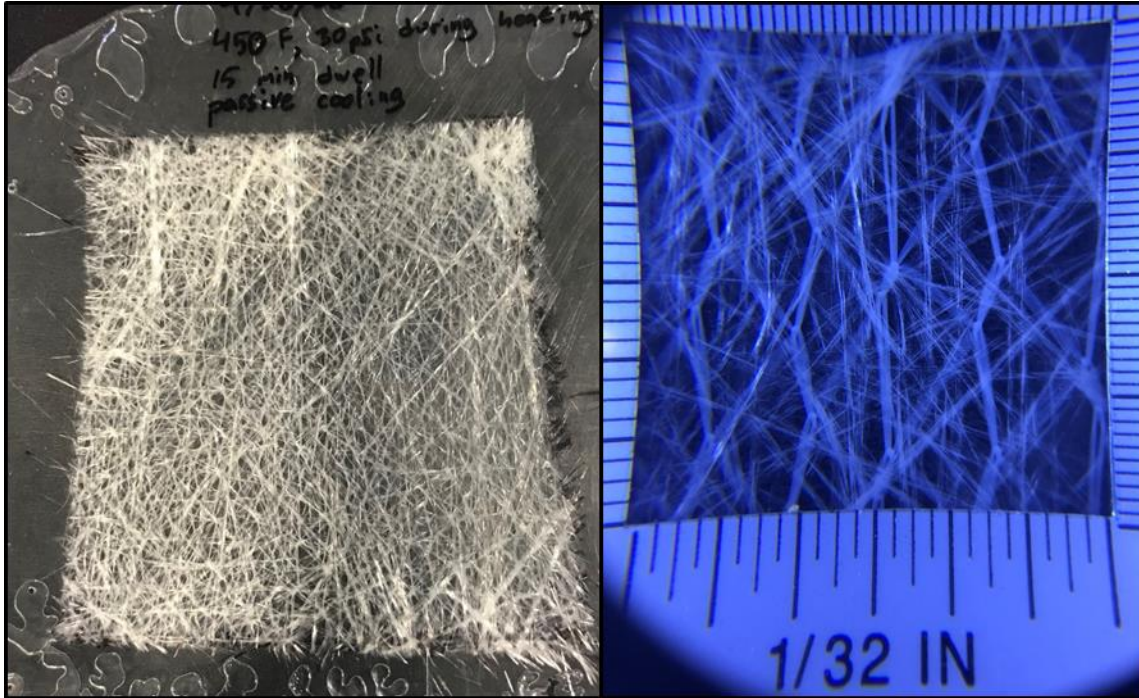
Trial CSM Sheet - 450°F / Initial 30 psi / 2 Resin Sheets / Passive Cooling
